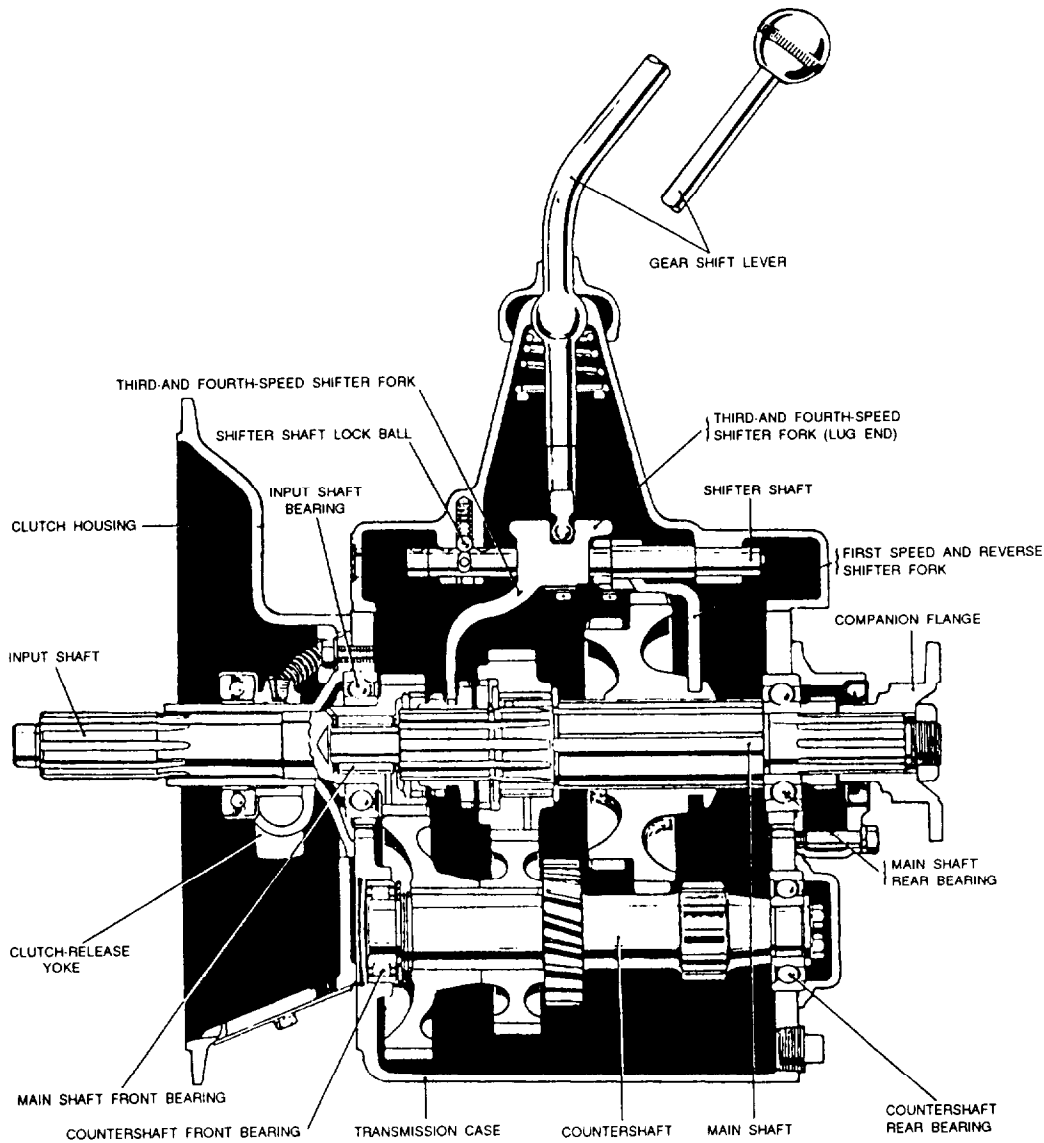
Constant-mesh transmission assembly—sectional view.
